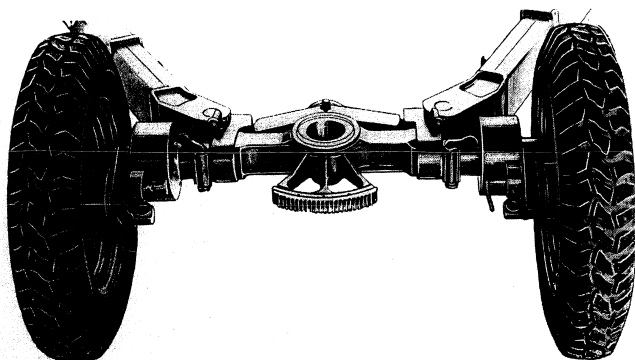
BOTTOM CARRIAGE FOR MOUNTAIN GUN 76 mm M.48 B1A1 — GENERAL VIEW
